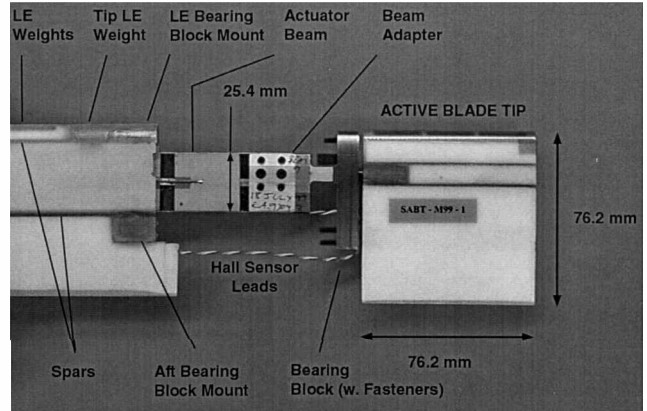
Closeup of the actuator beam and blade tip, during assembly.
